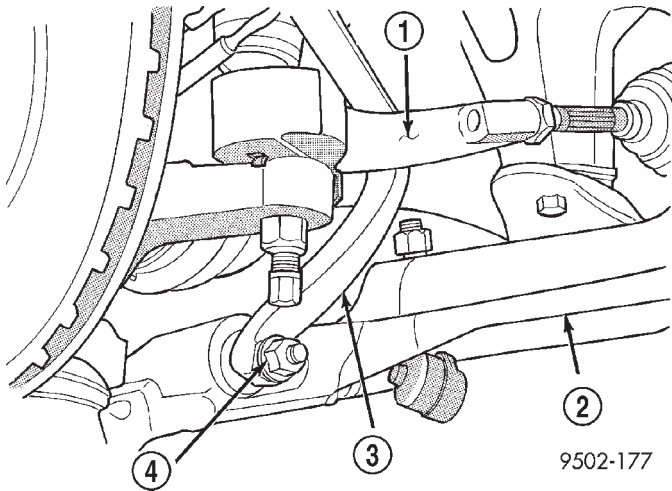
Shock Clevis To Lower Control Arm Bolts
